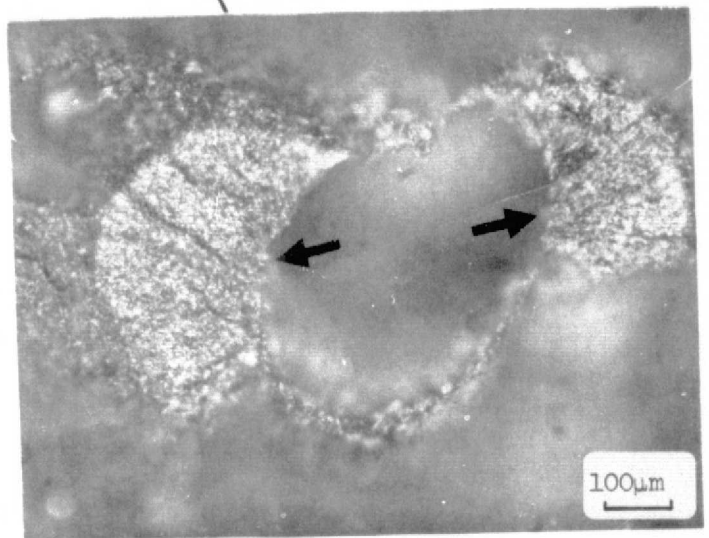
Typical cooling hole crack pattern observed on showerhead thermomechanical fatigue specimens
